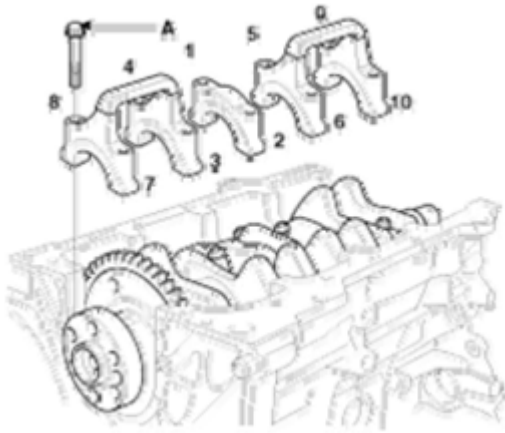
Identifying Tightening Sequence Of Bearing Cap Bolts
